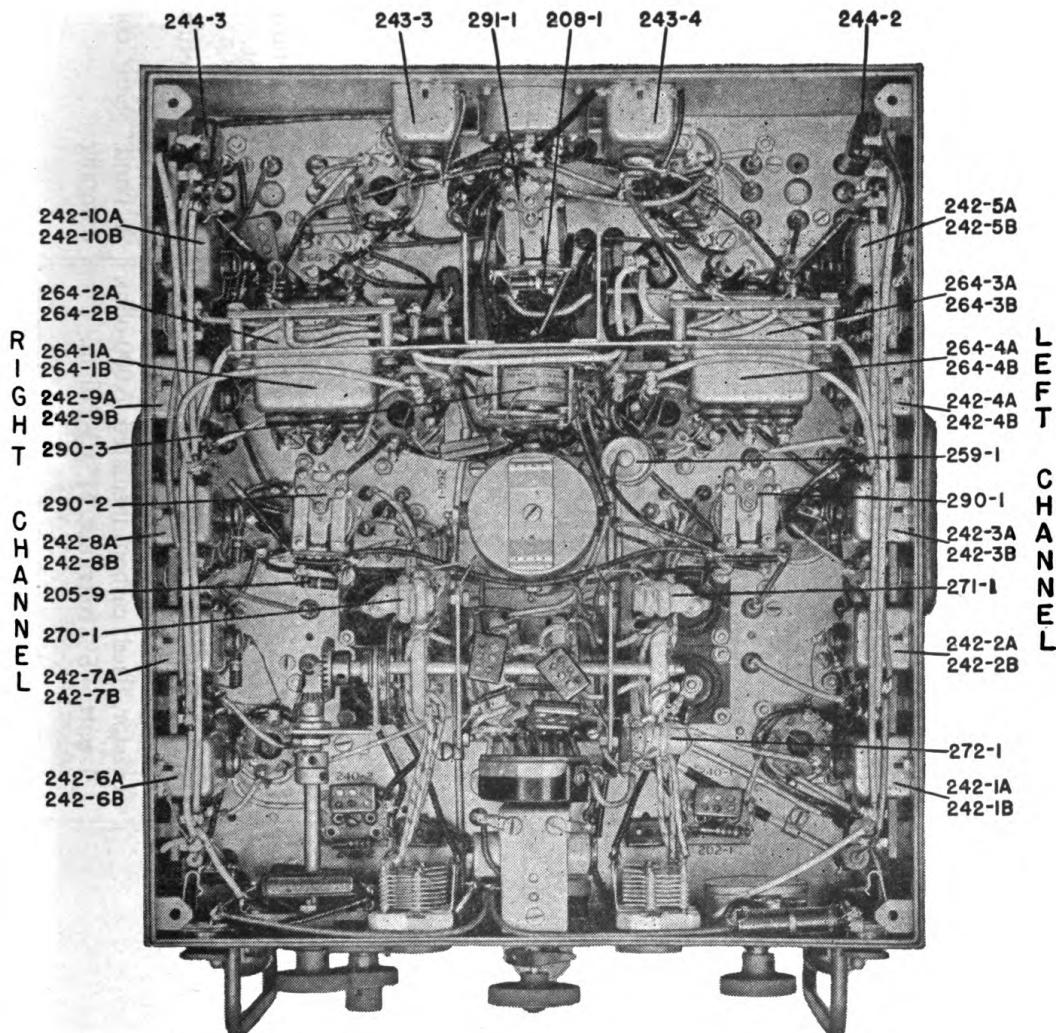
Chassis of Radio Receiver BC-1003-B, bottom view showing location of parts.
